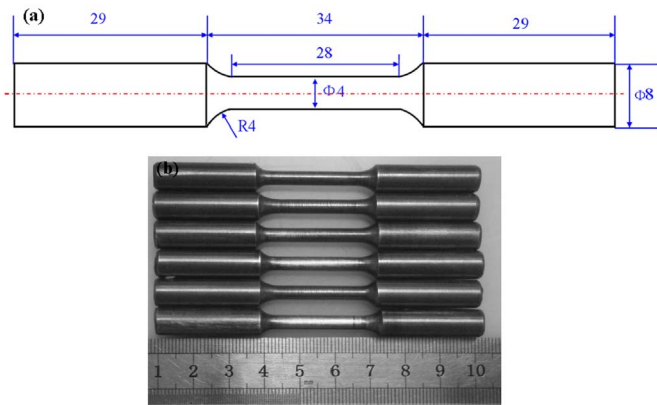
(a) Detail dimensions of the specimen (Unit is mm), (b) physical figure of the specimen.
